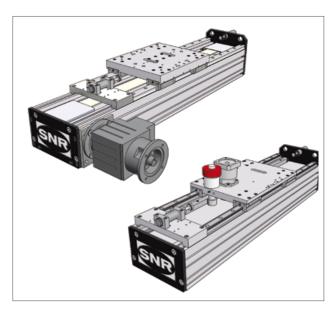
AXS Gantry Axis with toothed belt drive or rack and pinion drive
